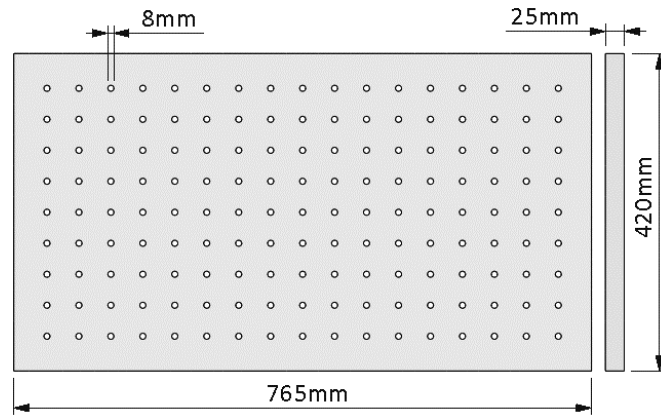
2D drawing showing the dimensions of the rigid base
